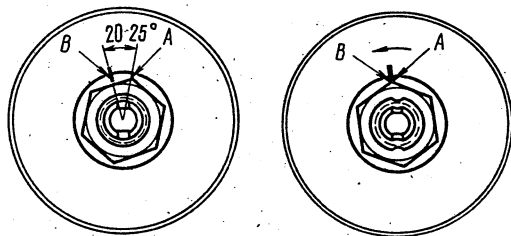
Adjusting the Front Wheel Hub Bearings:
